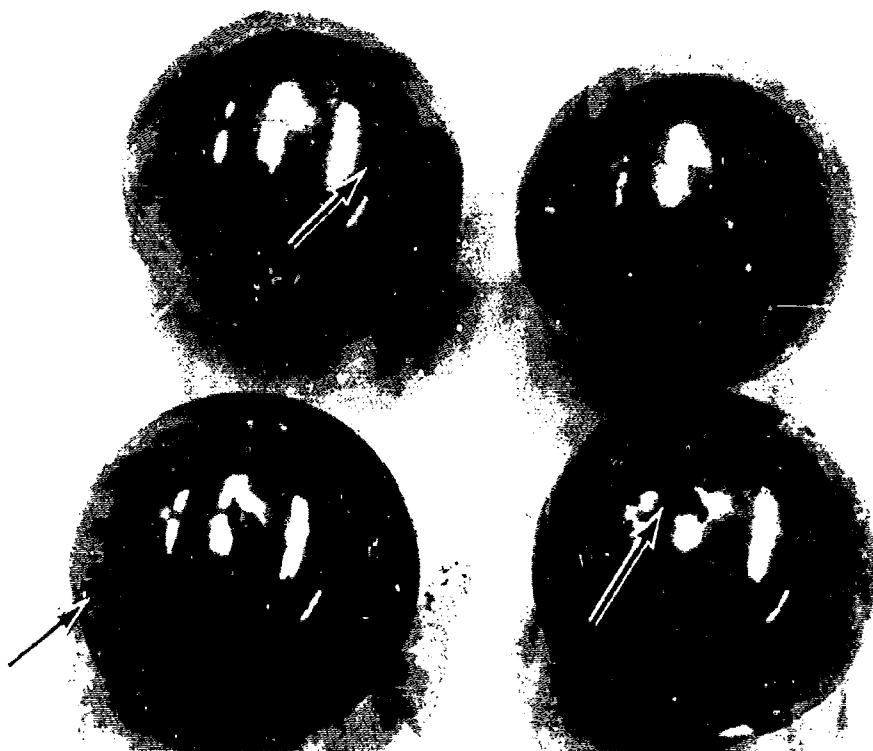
Balls from Bearing No. 6 After Corrosion Test.
